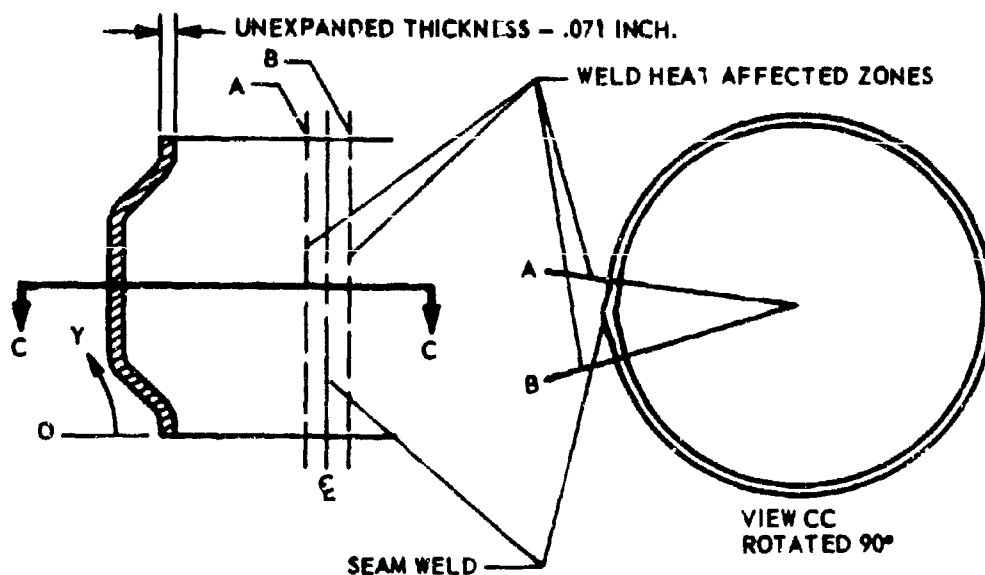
EXPLOSIVE FORM WELD TEST SPECIMEN - THICKNESS REDUCTION FOR 12% EXPANSION (SHEET 1)
